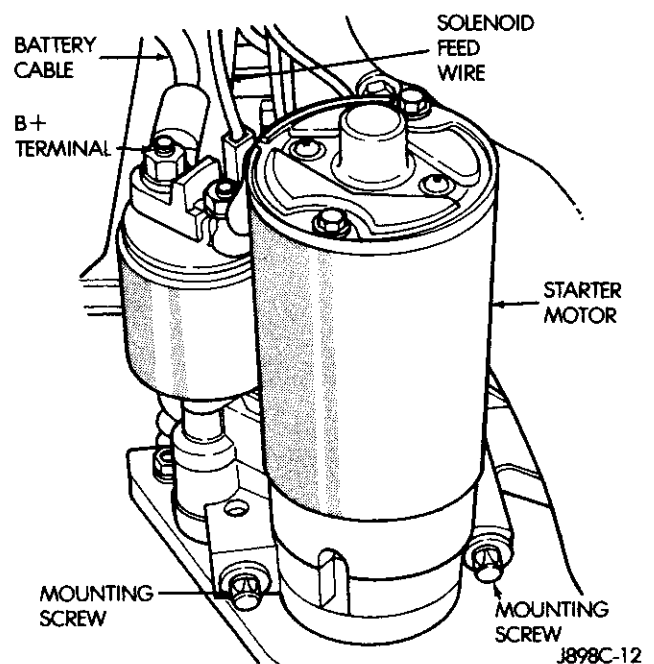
Starter Motor Removal/Installation - 2.5L YJ
